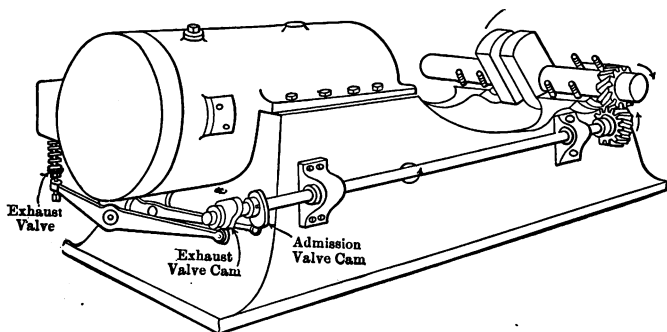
Showing Spiral Gear and Cam Shaft.
